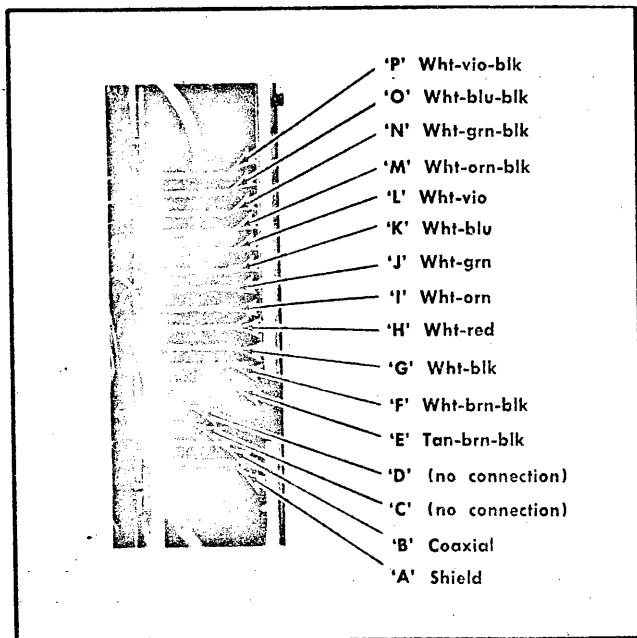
Wire and cable color code to the honeycomb square pin connector.
